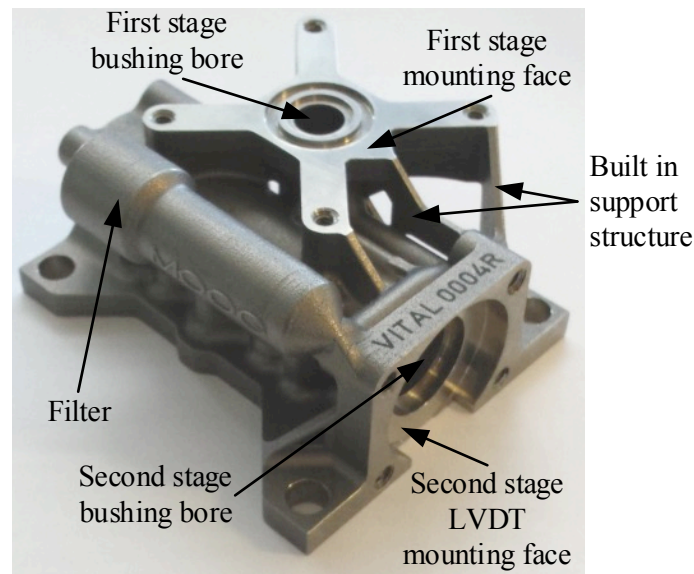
Photograph of the additive manufactured valve body prototype.
